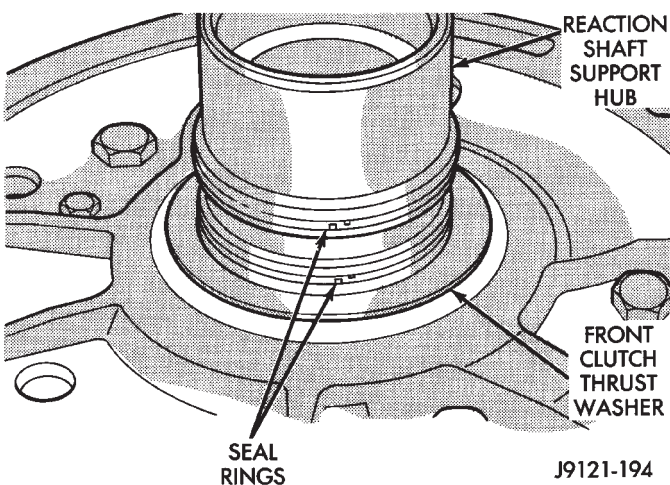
Reaction Shaft Support Seal Rings And Front Clutch Thrust Washer Position
